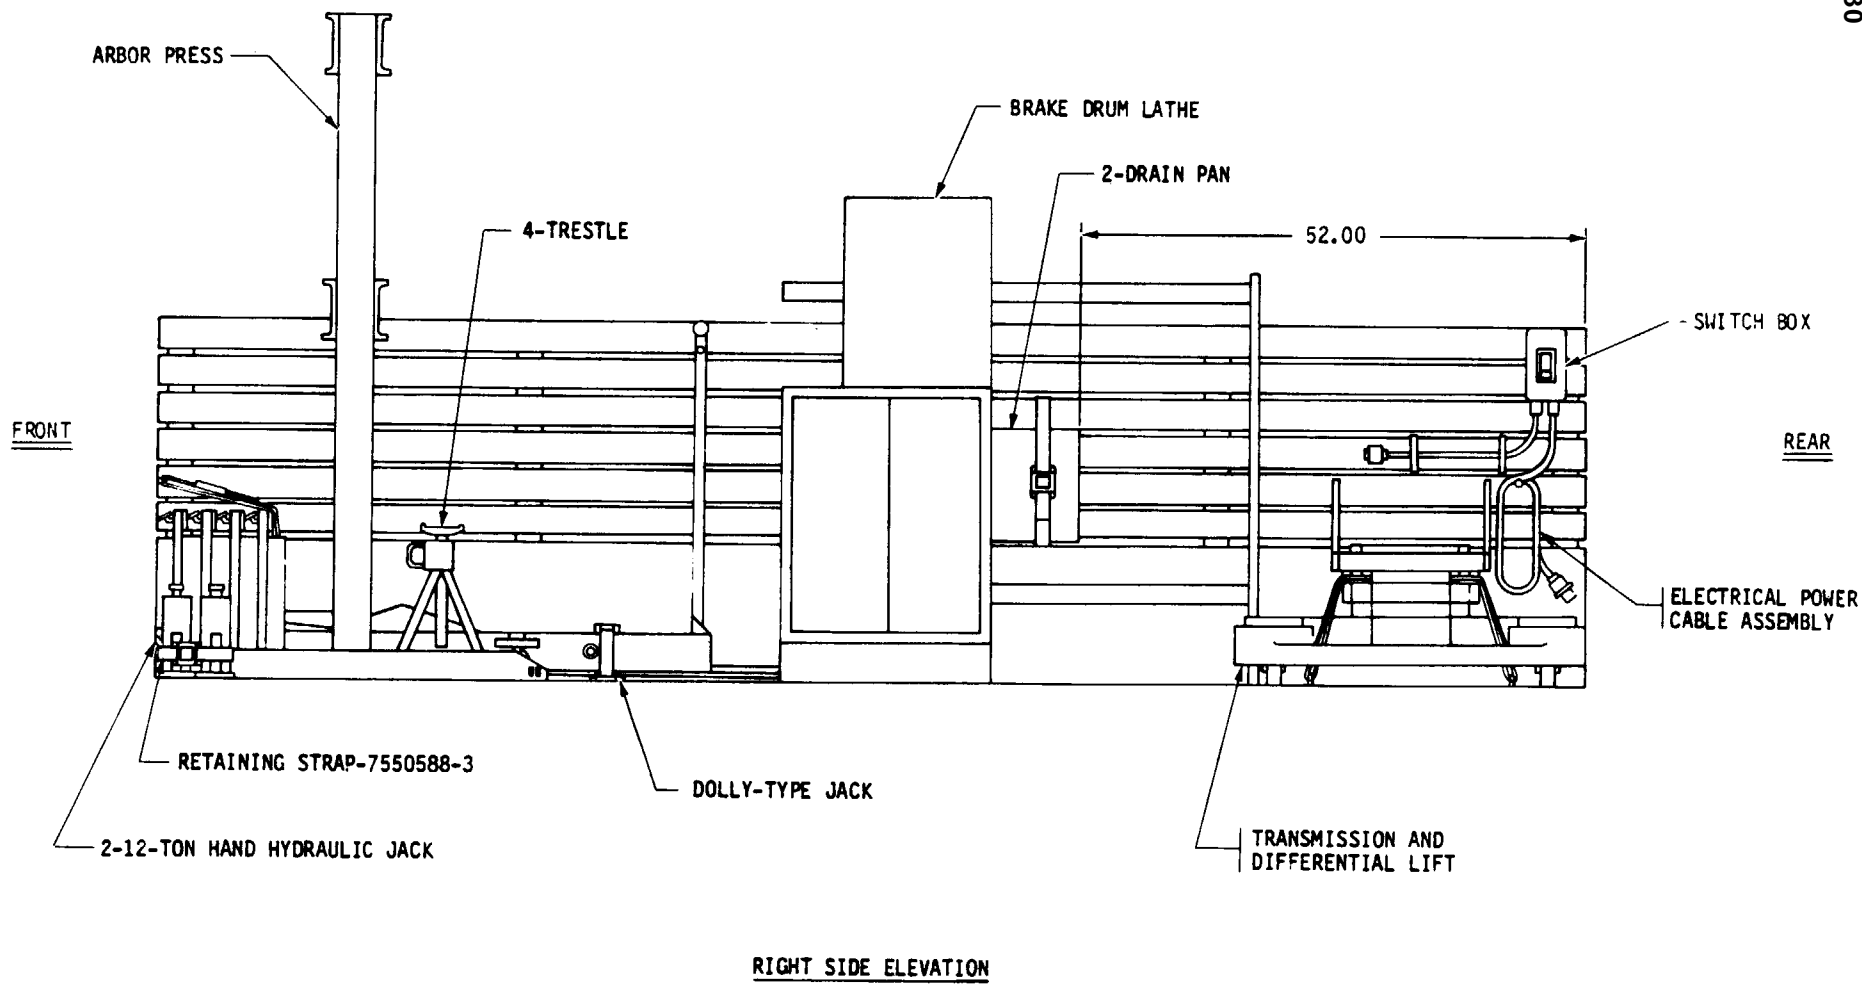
Components to be Mounted, Unit 2, M35A2, Right Side Elevation.
